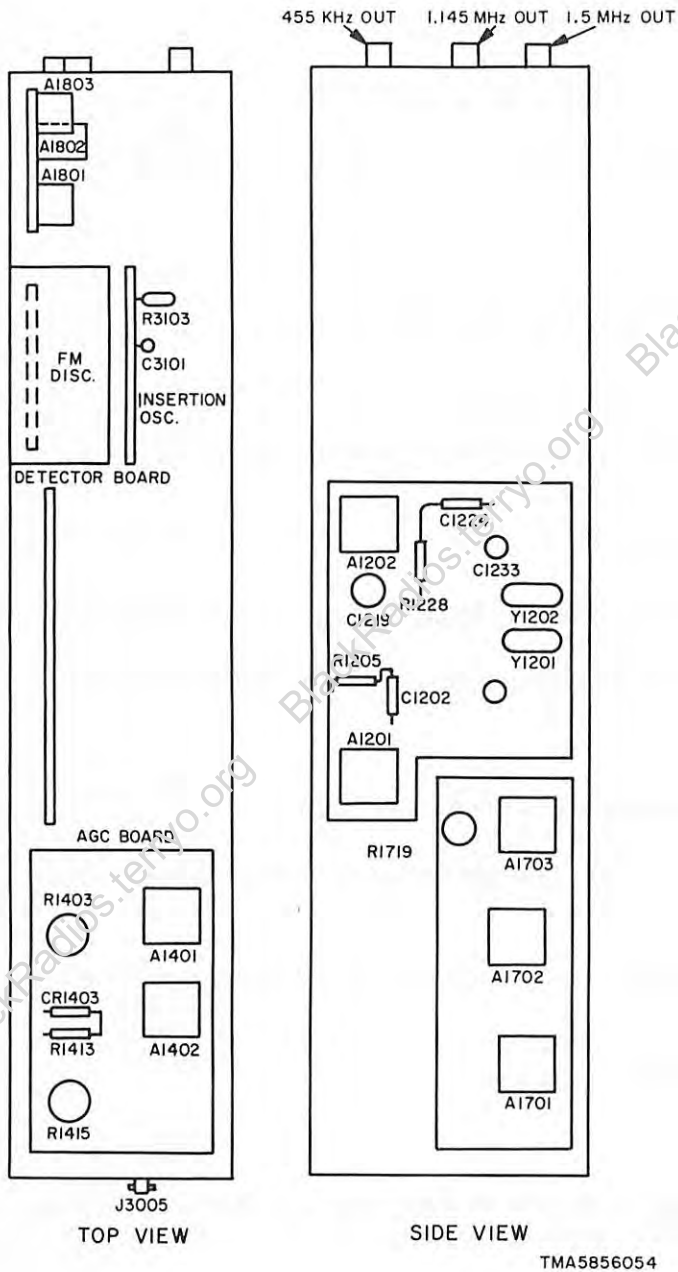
IF ASSEMBLY ALIGNMENT PARTS LOCATION
